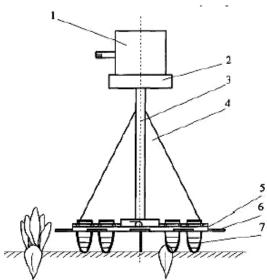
A device for cutting tops and cleaning heads to beet harvester Root: 1 - gearbox, 2 - Frame 3 - shaft, 4 - Bitters, 5 - CD 6 - than 7 - working elements.
